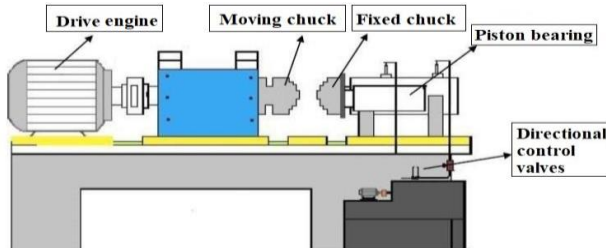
Schematic view of a continuous drive friction welding machine [25]
